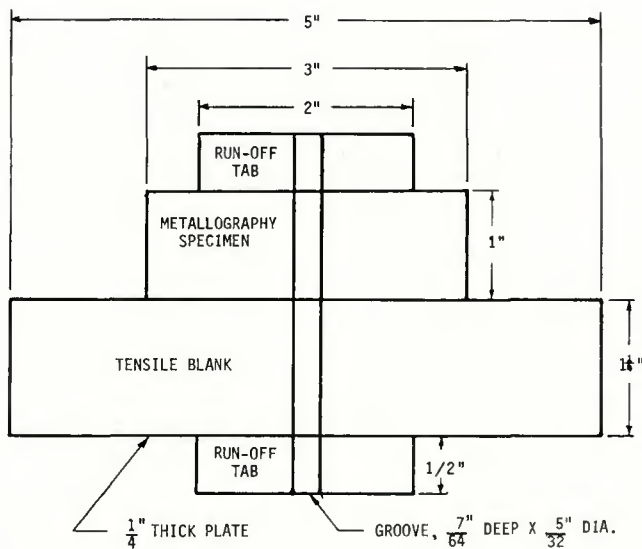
Workpiece preparation prior to GTA, GMA and submerged arc welding
